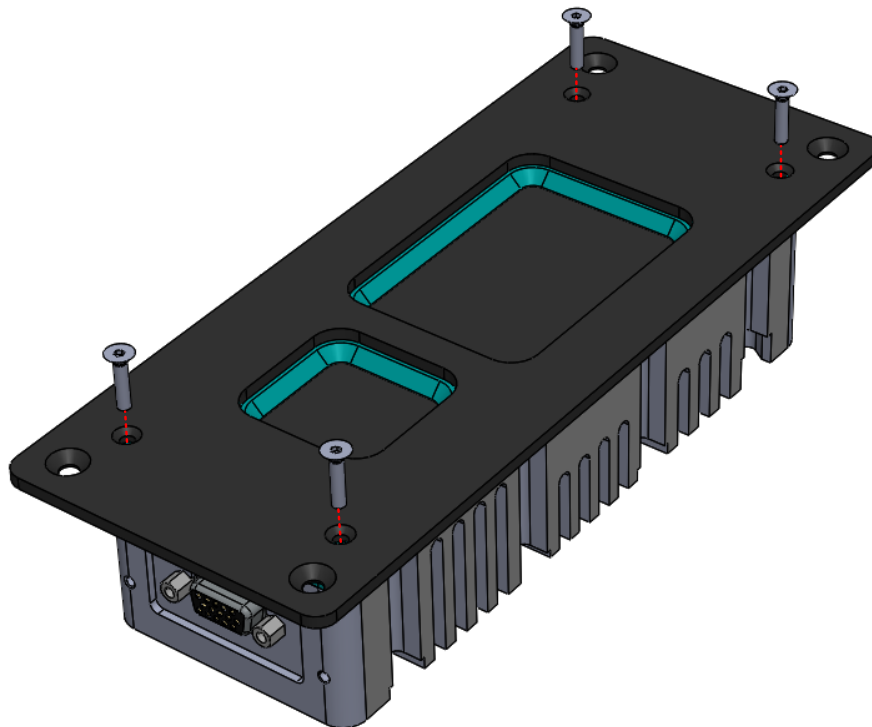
Mounting the flash-mount plate on the Argos3D-P2xx
